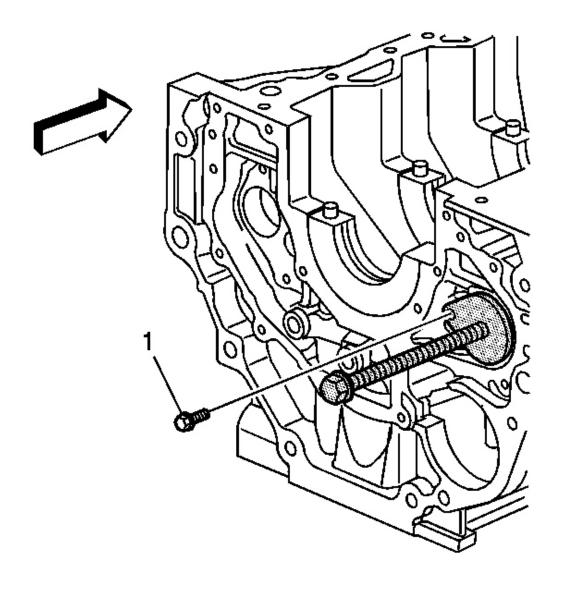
Installing Left Balance Shaft Mounting Bolt Courtesy of GENERAL MOTORS CORP.
